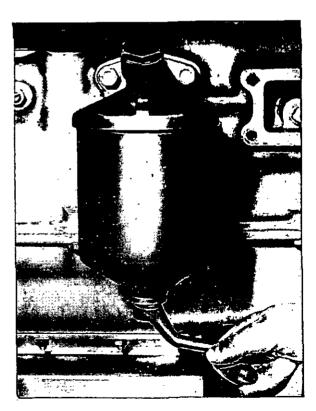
Unscrewing Filter Bowl Securing Bolt.
